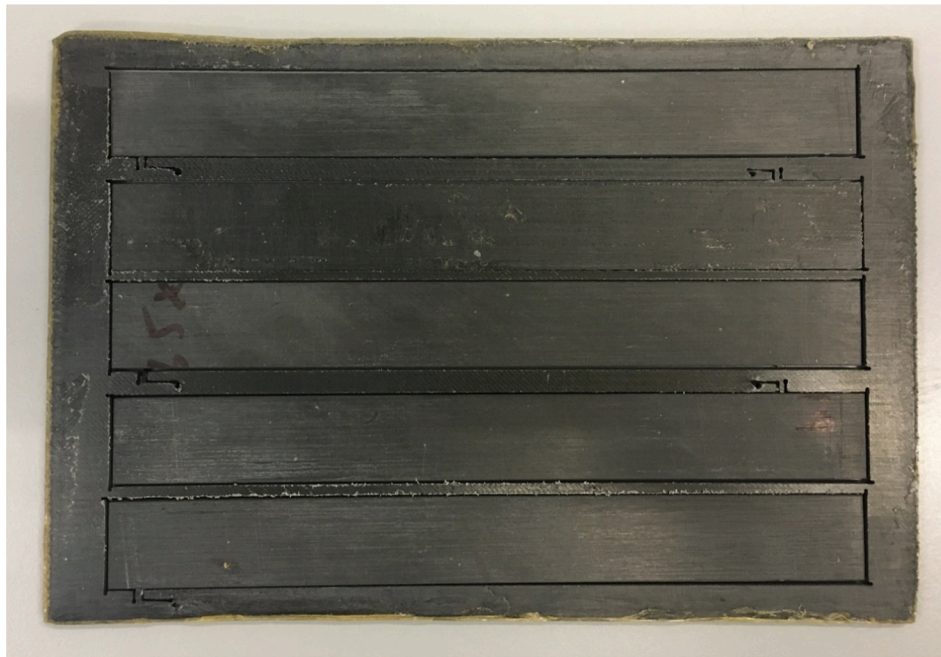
3D printed polymer composite plate after pressing and extracting the rectangular tensile samples using water jetting.
